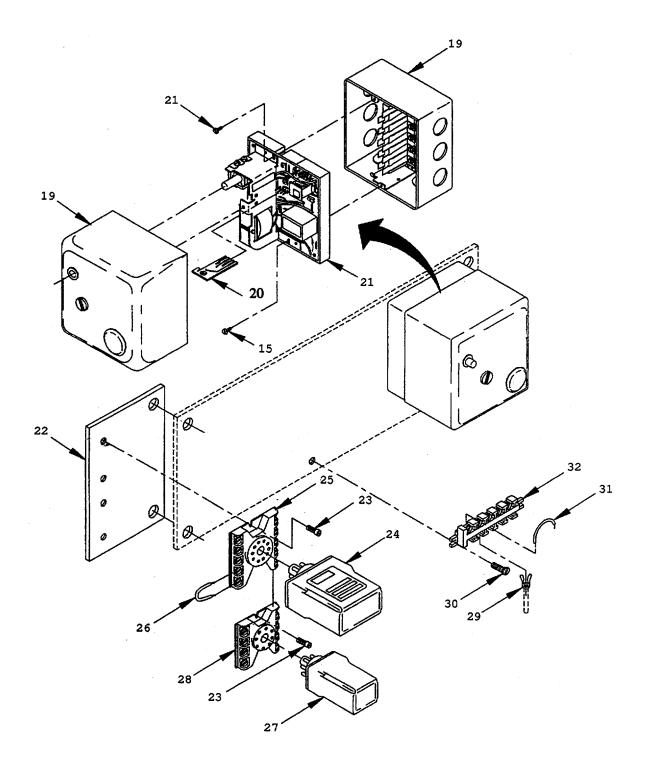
ELECTRIC CONTROL BOX ASSEMBLY (SHEET 2 OF 2)
